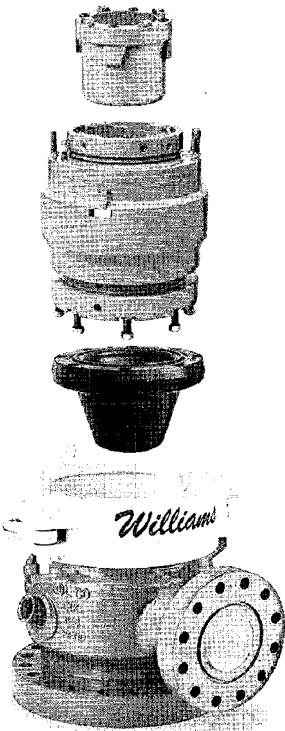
Rotating internal parts of the rotating head (courtesy of Williams Tool Company).
